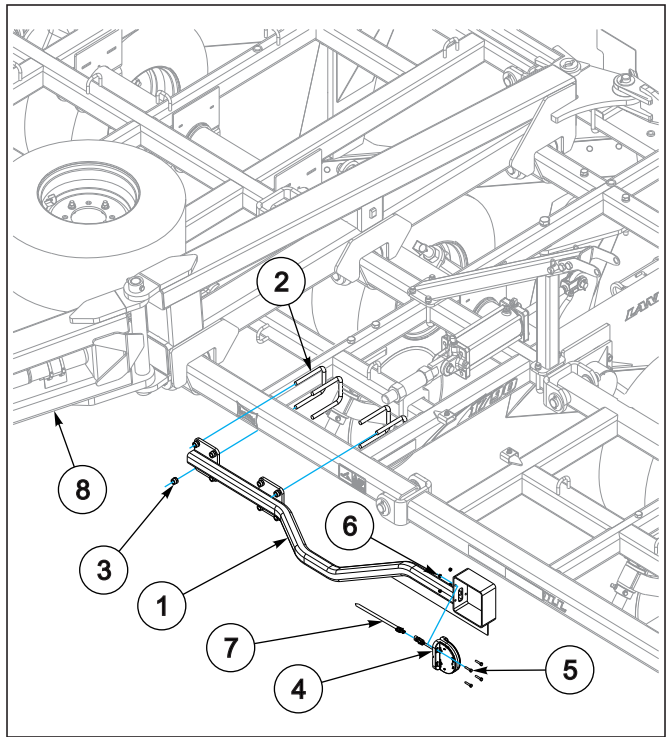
Front Light Bracket Assembly 1770, 1790 & 1710
